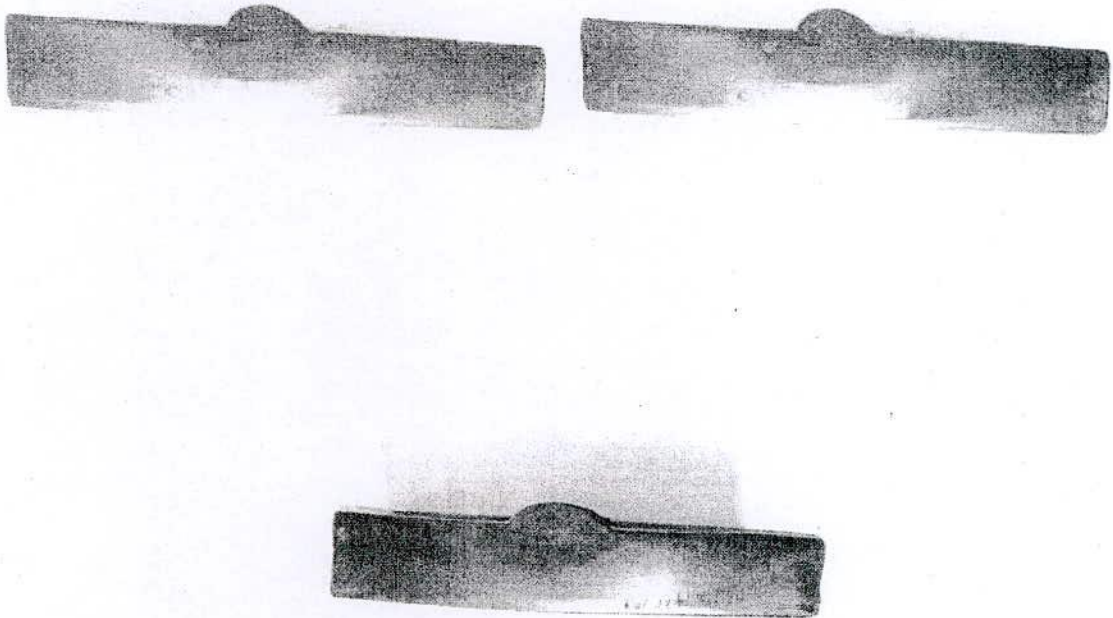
(e) Photograph of Bead Width, Bead Height, Penetrated and Heat Affected Zone of Weldment.
